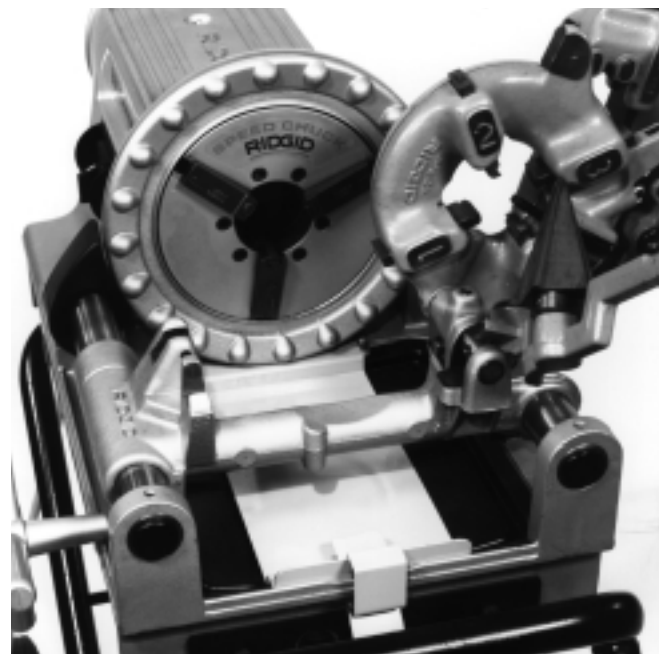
A – Oil Seal Pressure Plate Properly Inserted
